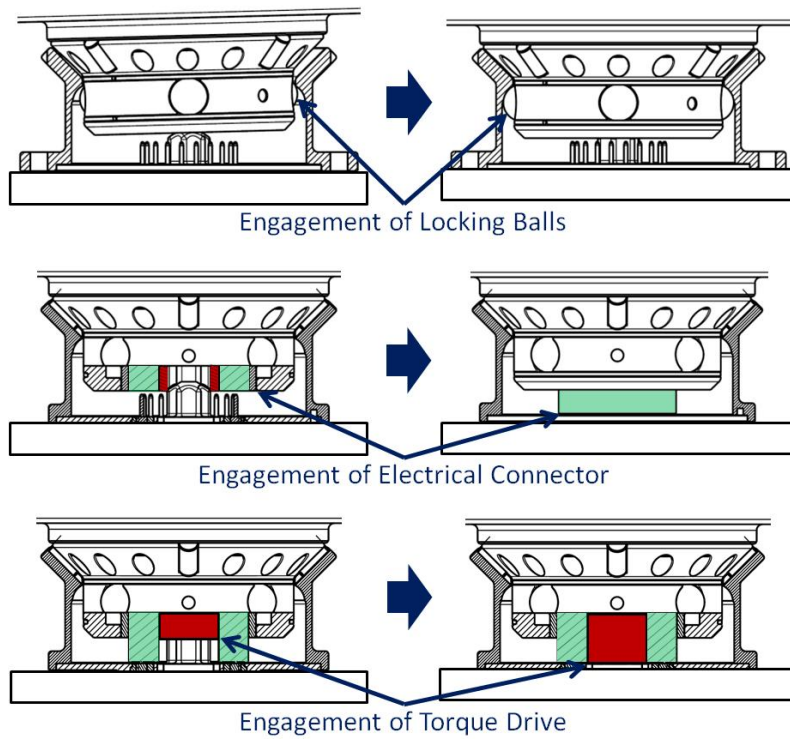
Oceaneering Tool Changer and CRS Engagement Sequence
